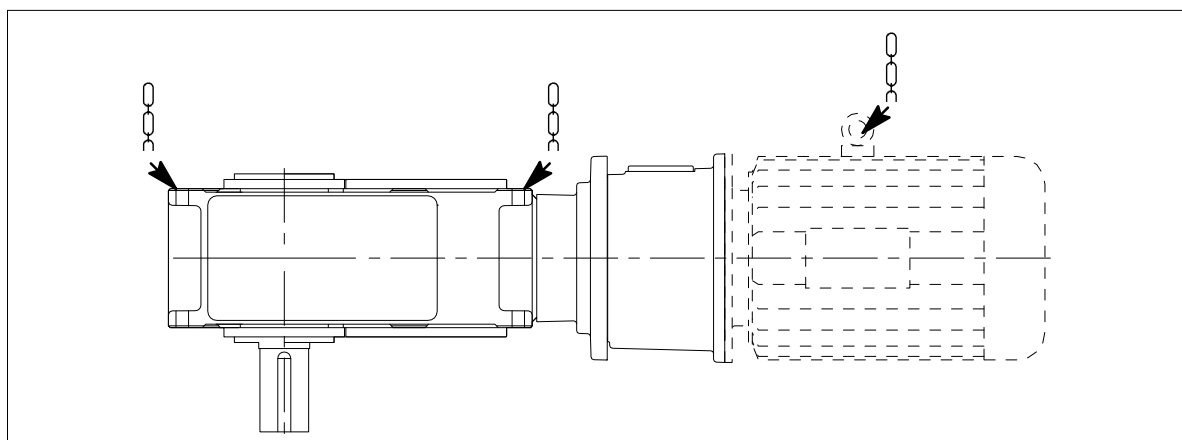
Attachment points on gear units of types H..V and B..V
